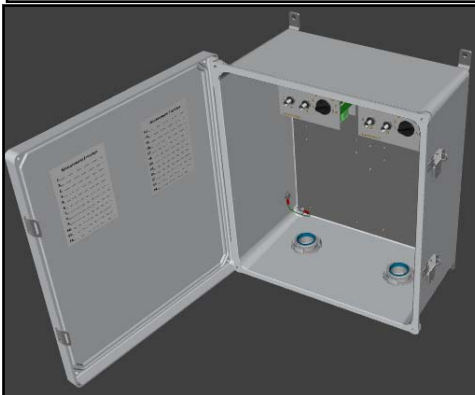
DSB1002-16B—Top view. Note the conduit fittings, mounting feet, switch modules, side latches and measurement location cards (on the inside of the front cover) exactly as this enclosure would be received from CTC.
